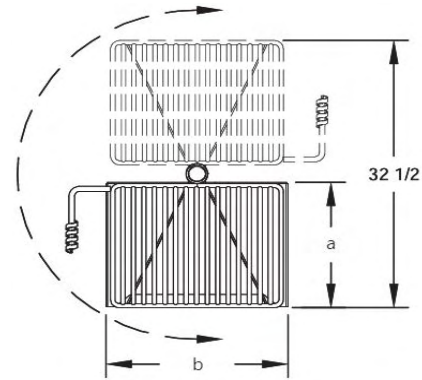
The accessible park grill from Pilot Rock. Image courtesy of Pilot Rock, 2024.
